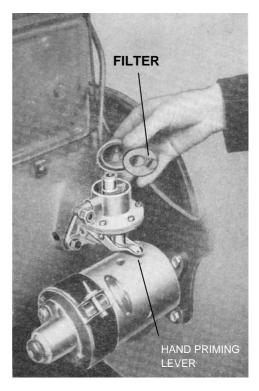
The Petrol Pump Filter and Hand Priming Lever
